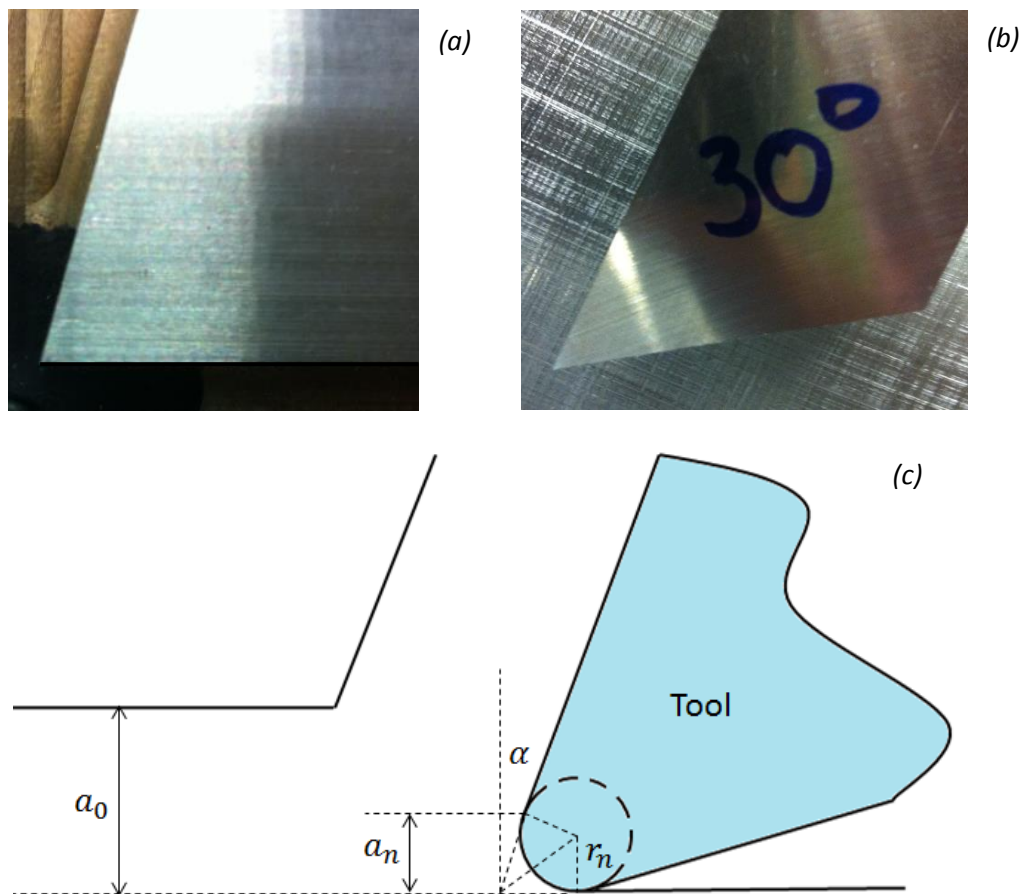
Cutting edge and the effect of nose radius: (a) cutting edge of the 15° cutting die, (b) cutting edge of the 30° cutter used in the planer machining, (c) evaluation of the effect of nose radius
